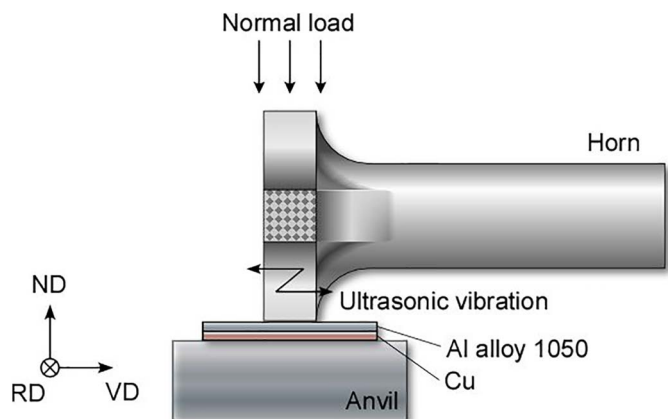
Schematic of ultrasonic welding, as performed in this study.
